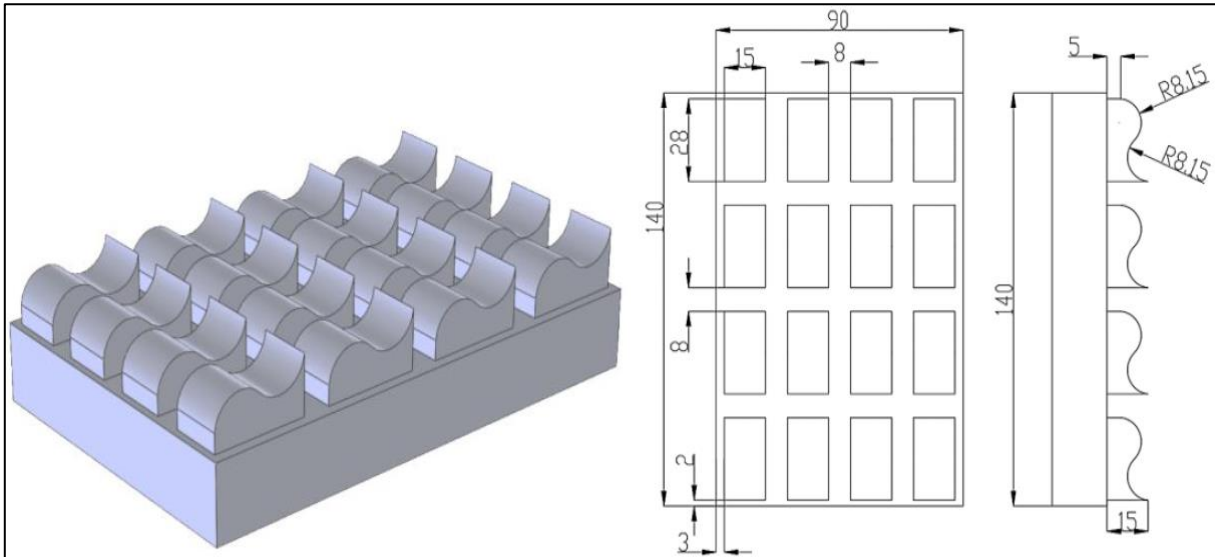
Design and dimensions of the workpiece (İş parçasının tasarımı ve boyutları)
